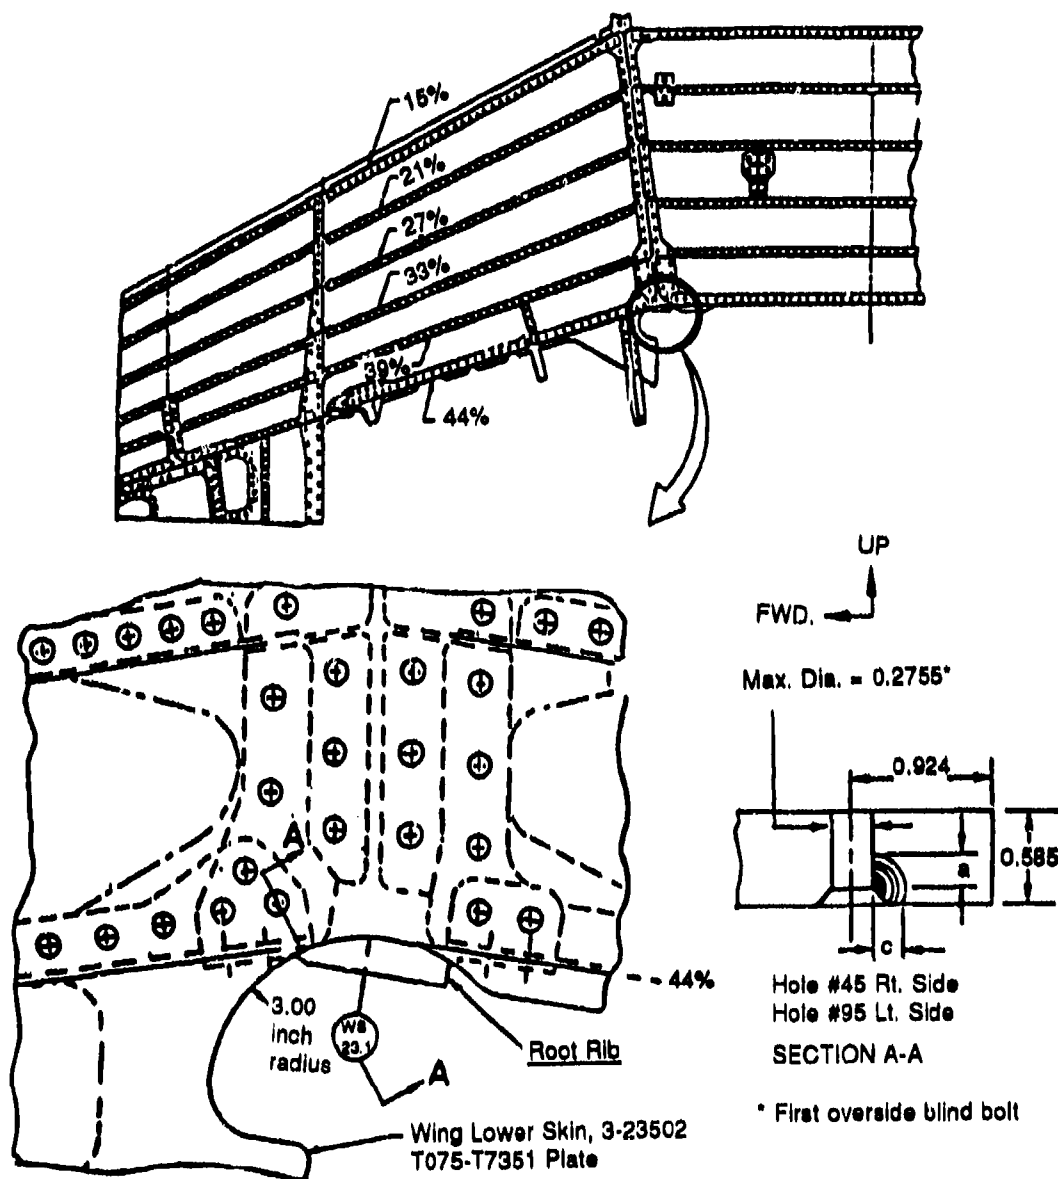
Geometrical Description of WS27, the Lower Wing Skin Fastener Holes Located at the 44% Spar of the -29 Wing.
